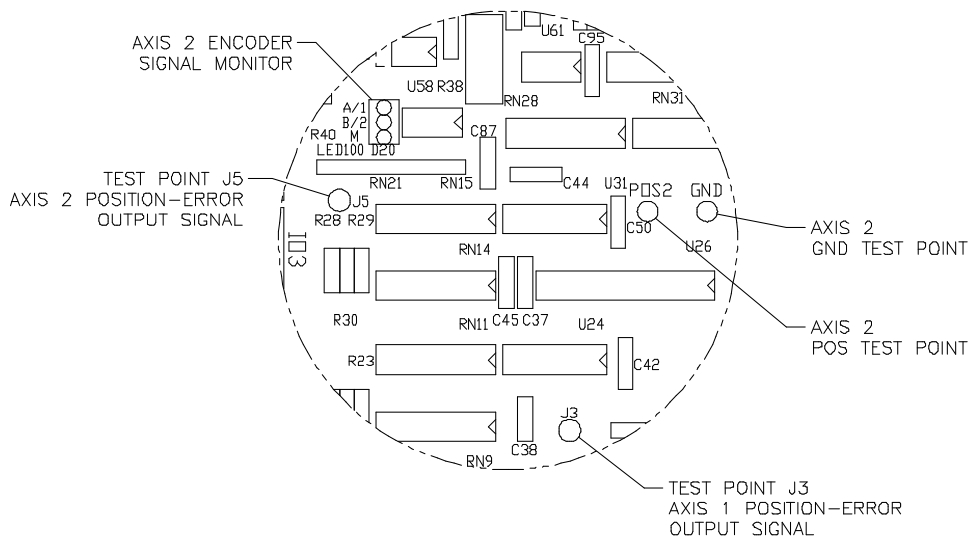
Axis 1 and Axis 2 Test Points and Indicators
